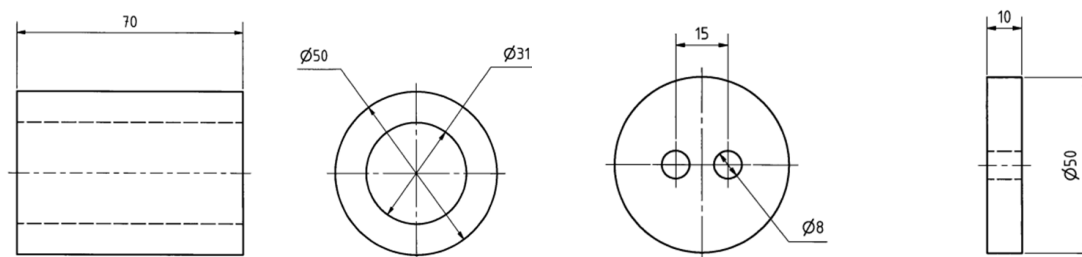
Teflon cylinder and specimen holder dimensions.
